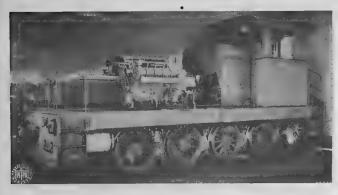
A MERCEDES-BENZ diesel engine MB 820 B without supercharging, Ne = 700, n = 1,500 r. p. m. being mounted in a shunting locomotive of Messrs. Krauss-Maffei A. G., Munich.
